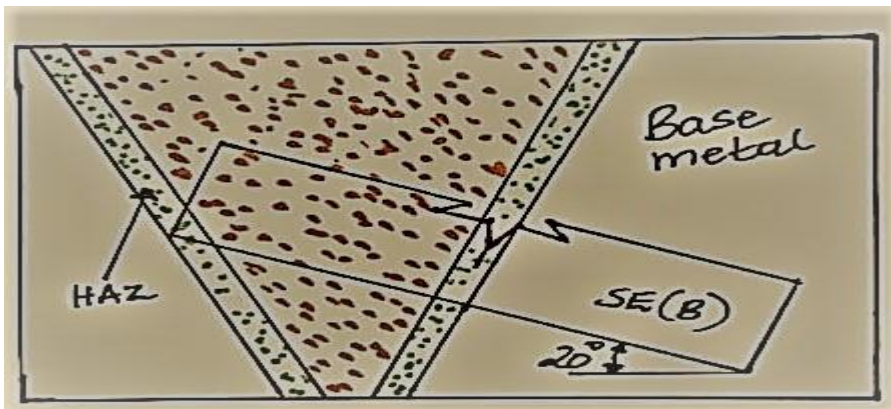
Design options for notches in fusion weld joints, (SENB) specimens.
